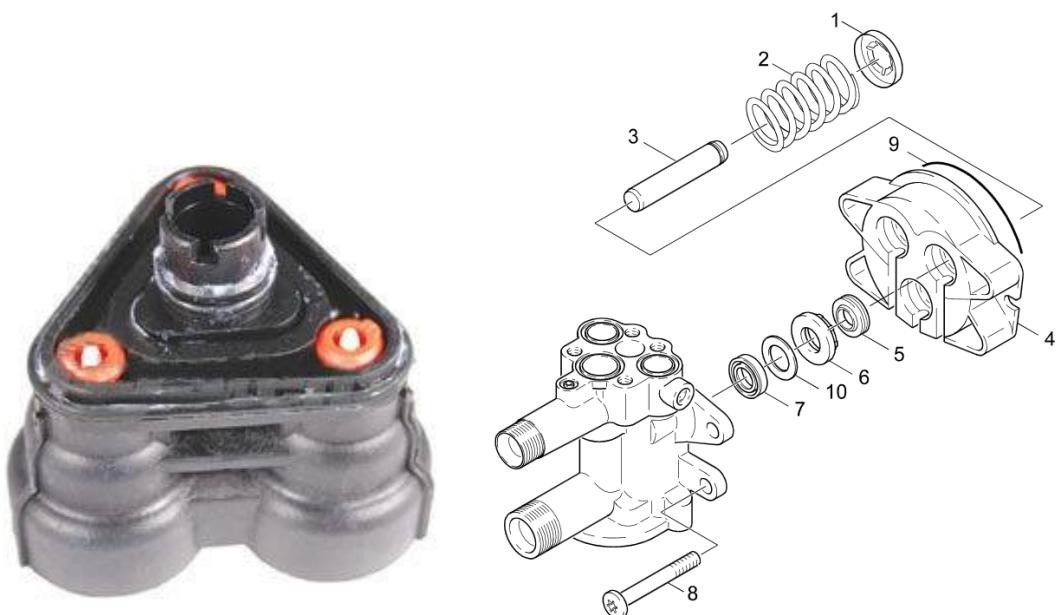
Water pump with a manifold assembly that houses the chemical injector, a pressure check valve (unloader valve) and the inlet and outlet tubes
